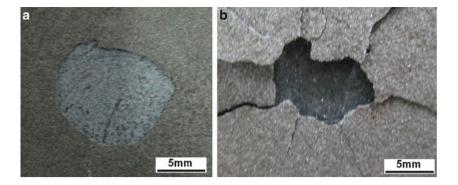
Photo after test for (a) re-melted coating and (b) as-sprayed coating
